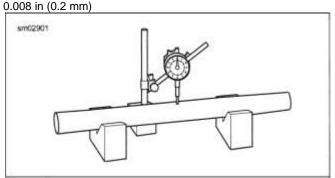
Measure Fork Tube Runout Initial Assembly
